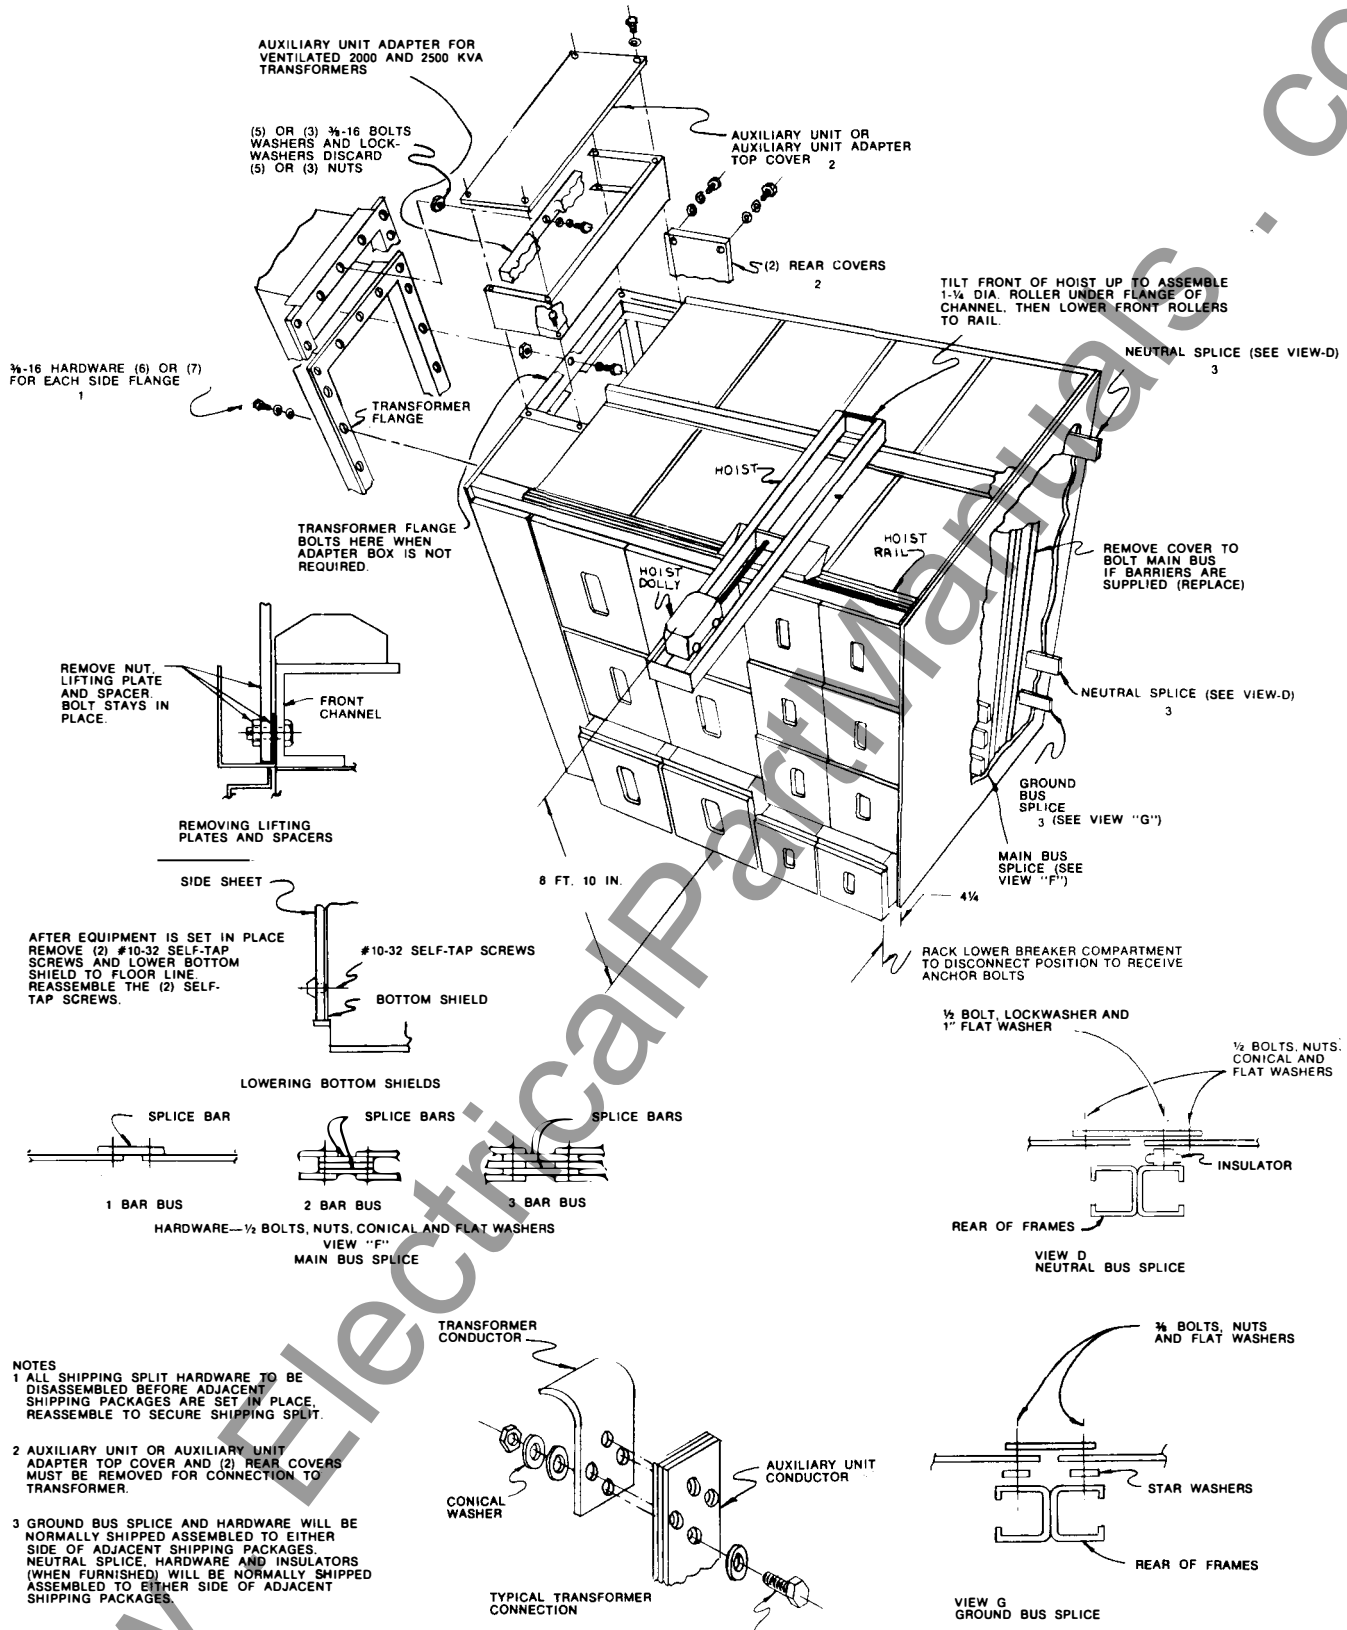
(0673D0500-265) Assembly of Indoor Equipment
